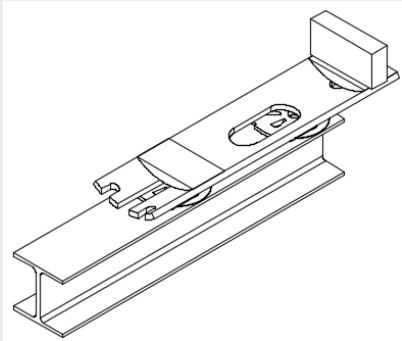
Isometric View IS20 Part, anchor, and force Block
